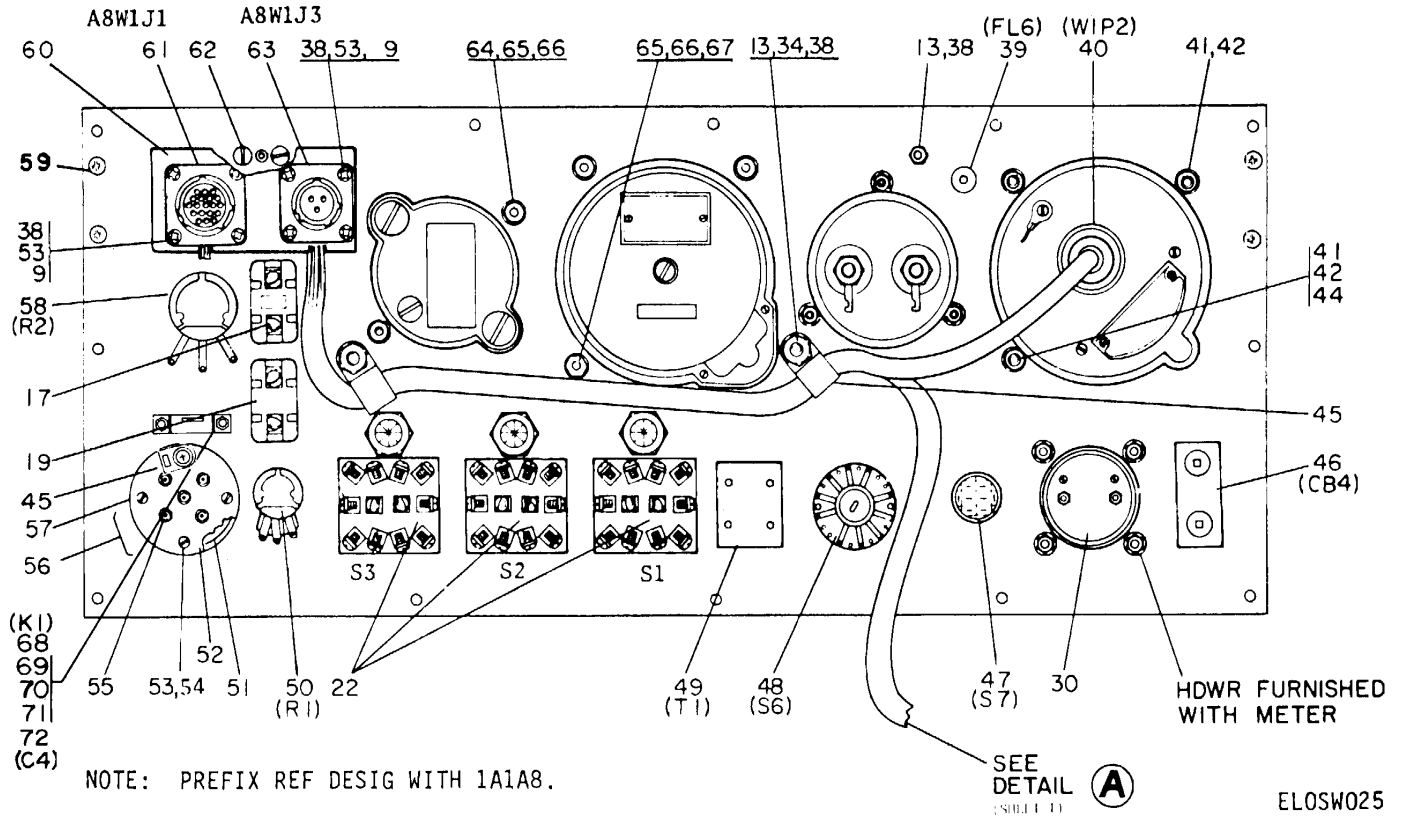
Front Panel Assembly (Sheet 2 of 2).
